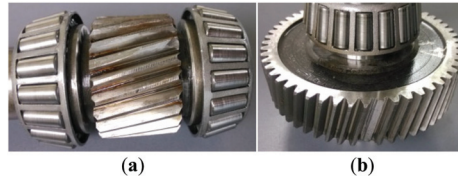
(a) Pinion-tooth partial fracture fault and (b) gear-tooth fracture fault.
